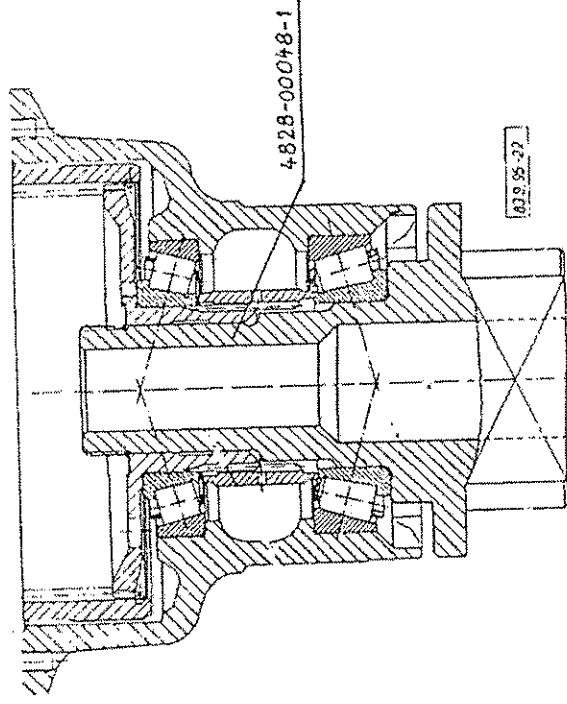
THE WHEEL HUB PRE-ASSEMBLING OF
